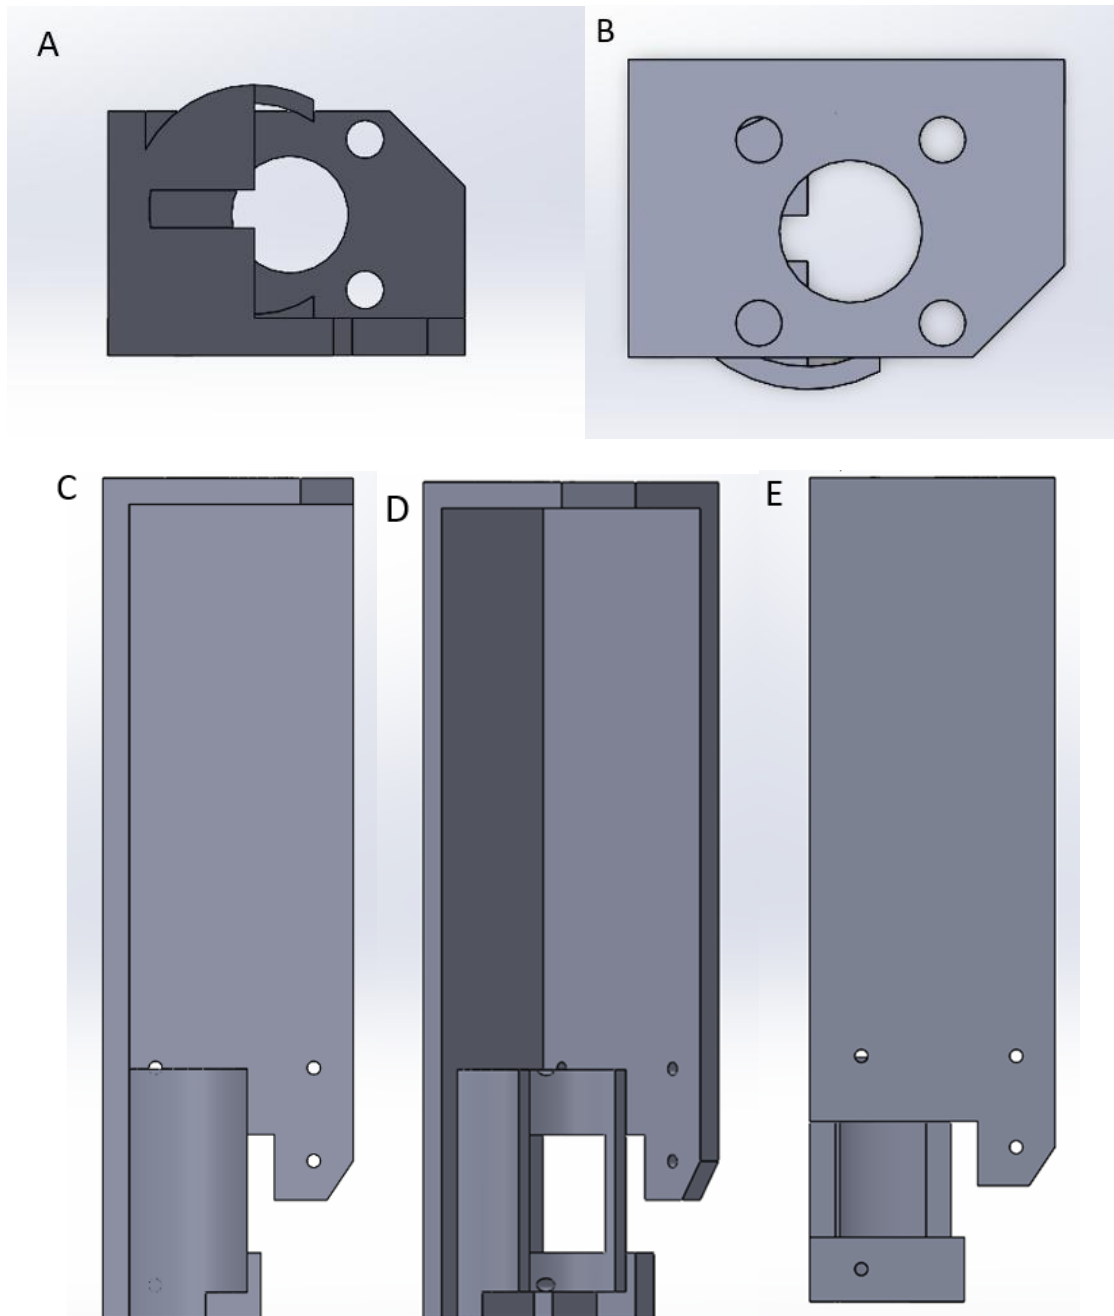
3D Model of the Mount Part Created Using SolidWorks, A – Bottom View; B – Top View; C- Left Side View; D – Diagonal Front View; E – Back View
